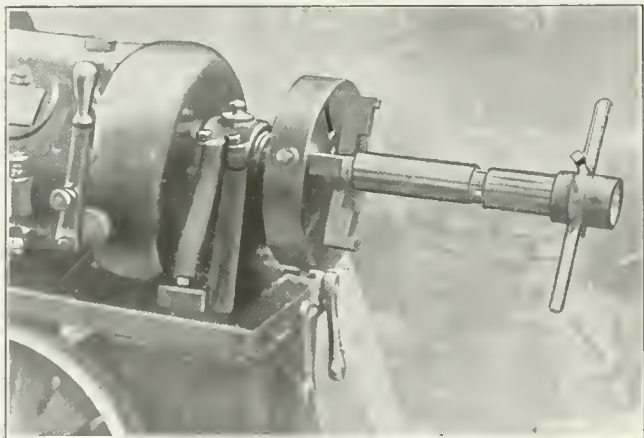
Geared Lathe Head used in Same Way as in Fig. 14
